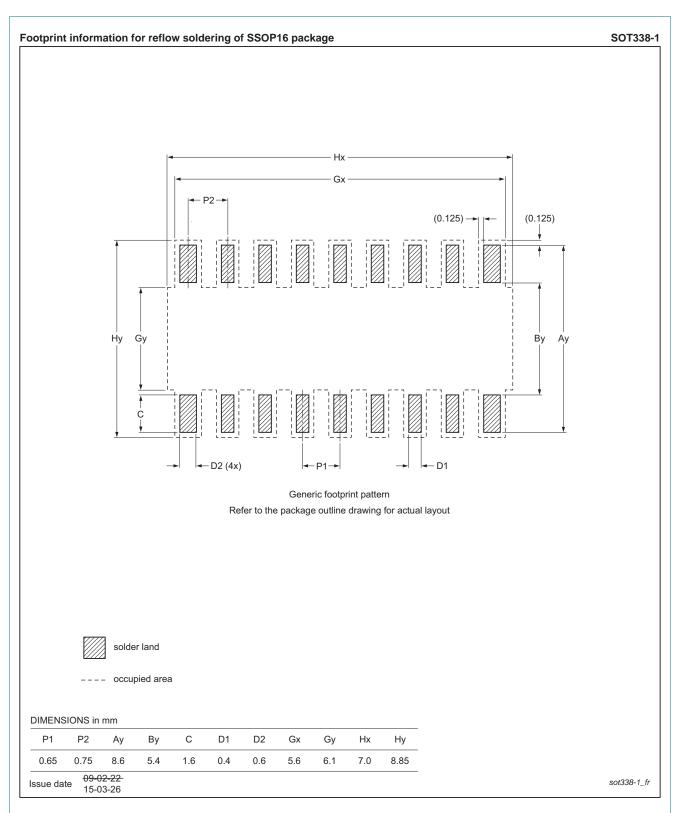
PCB footprint for SOT338-1 (TSSOP16); reflow soldering
